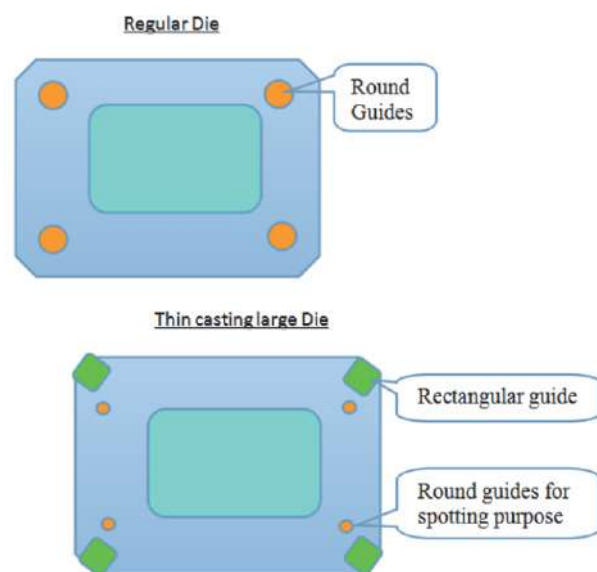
Guiding arrangement for Die blocks of Light weight castings
